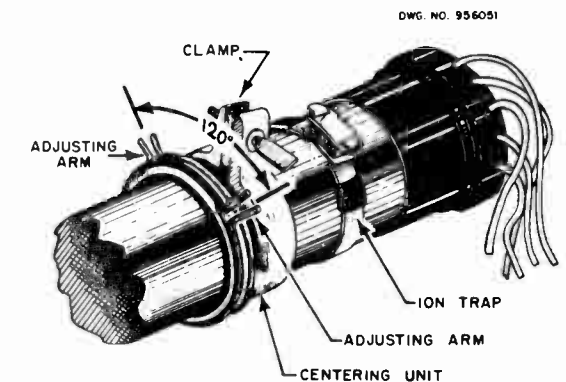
CENTERING UNIT LOCATION DRAWING
